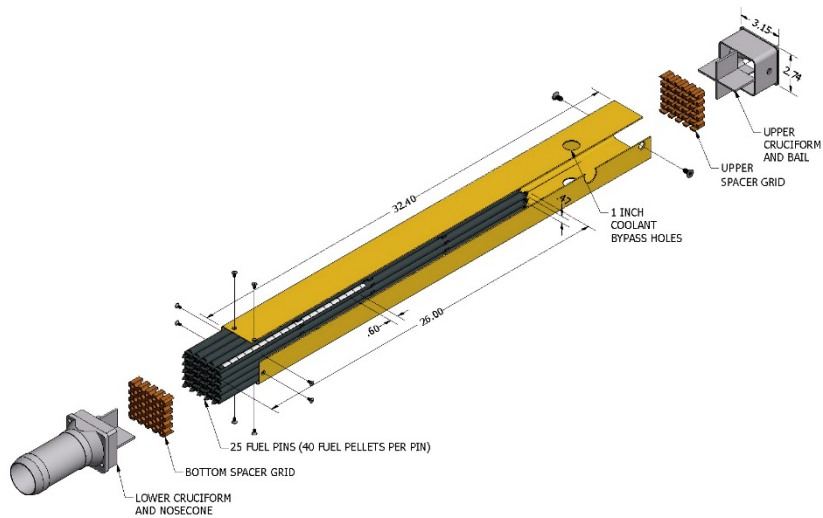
Expanded View of a NCSU PULSTAR Fuel Assembly Showing the 1-inch Bypass Flow Holes
